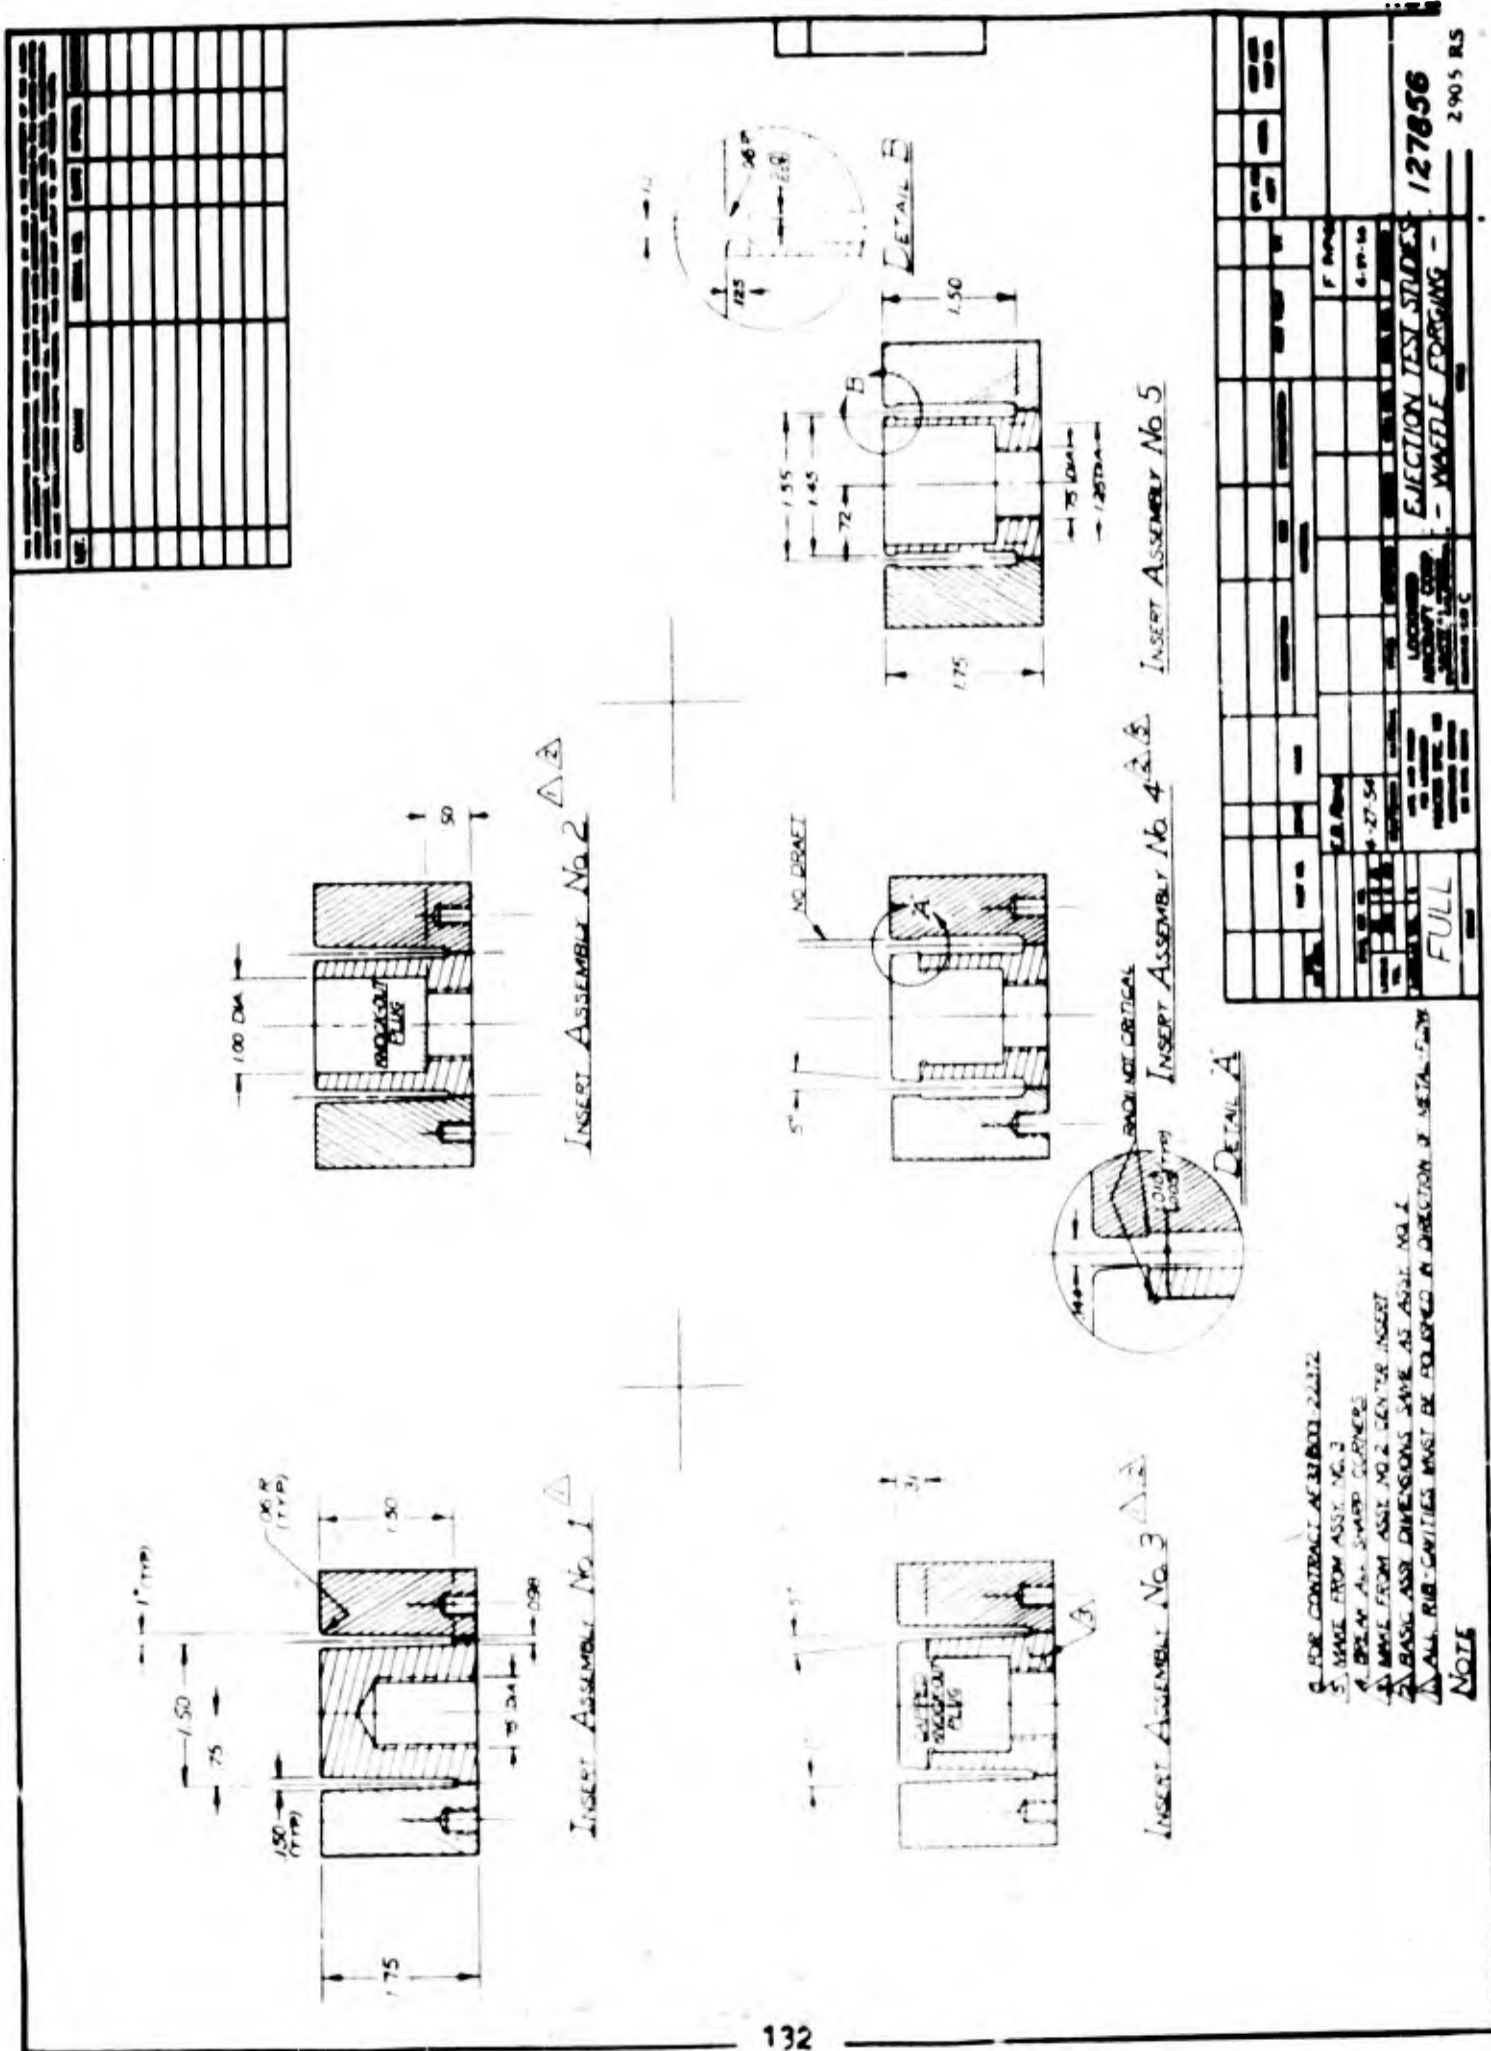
Sectional aspects of the die insert Nos. 1 through 5.
